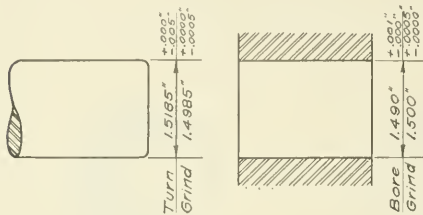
Shaft and Hole 1 1/2 in. Nominal Diameter Dimensioned for Running Fit
